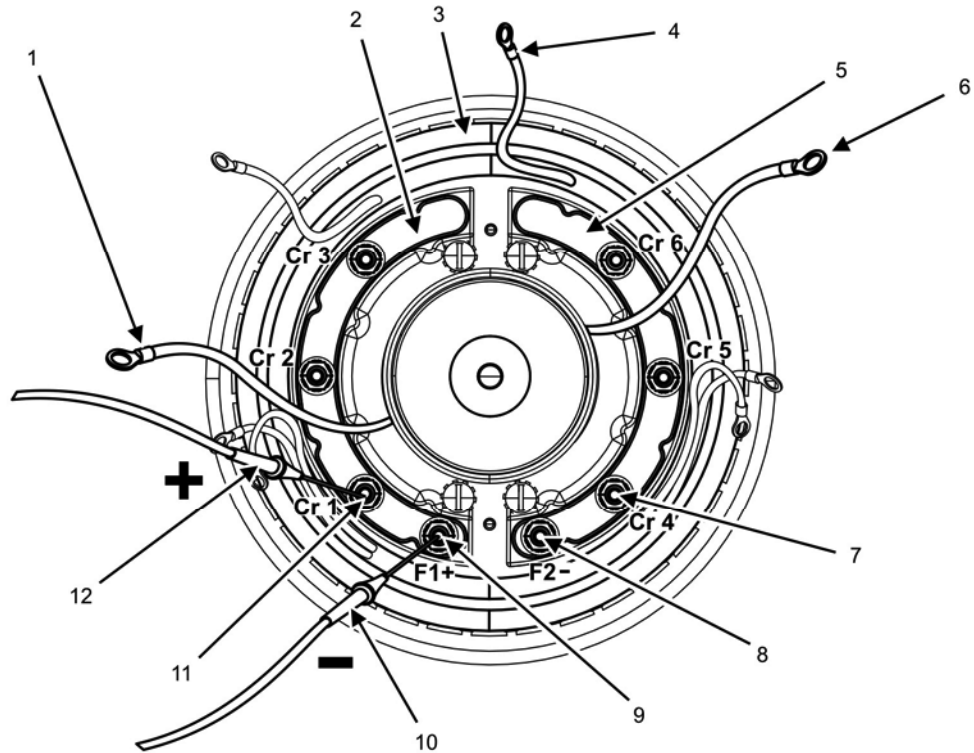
Test 400 Hz Rectifier, Exciter and Generator Rotor.
